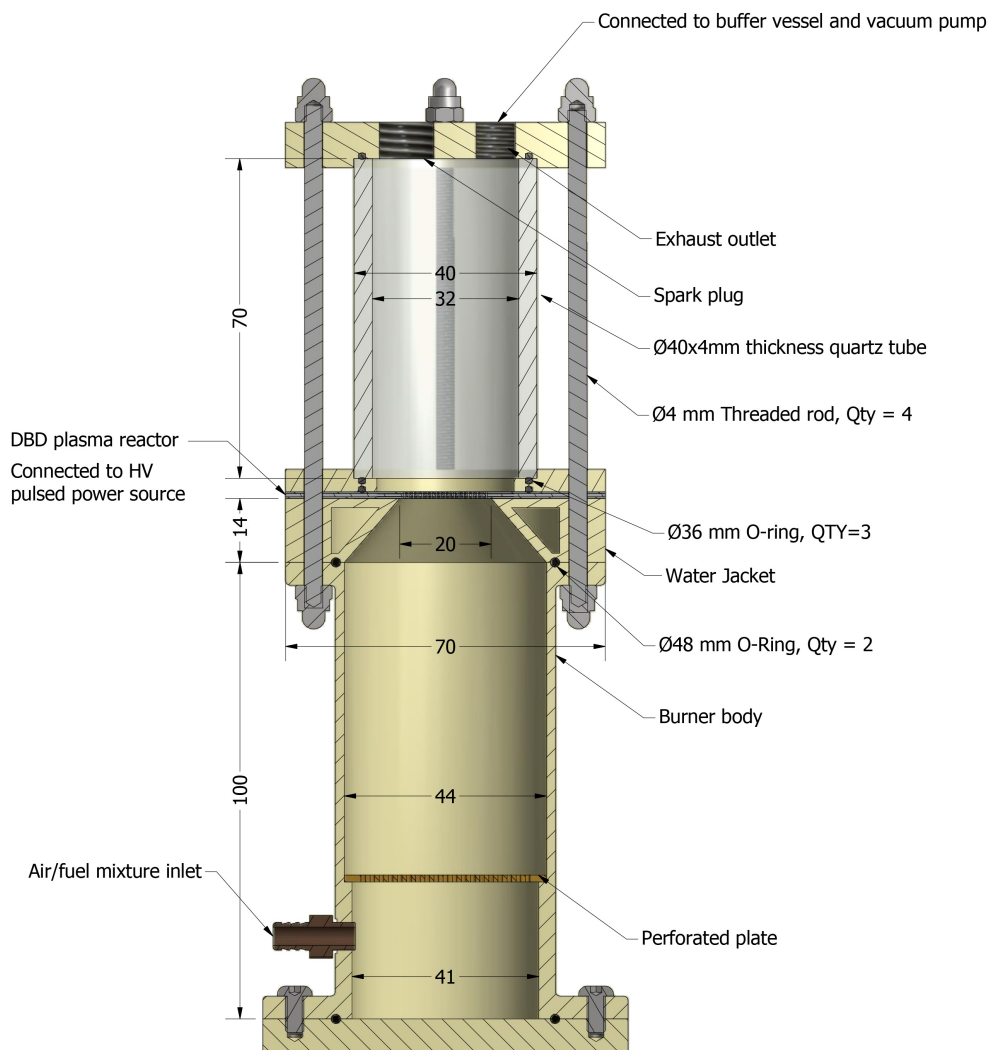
Detailed drawing for the burner configuration (all dimensions are in mm).
